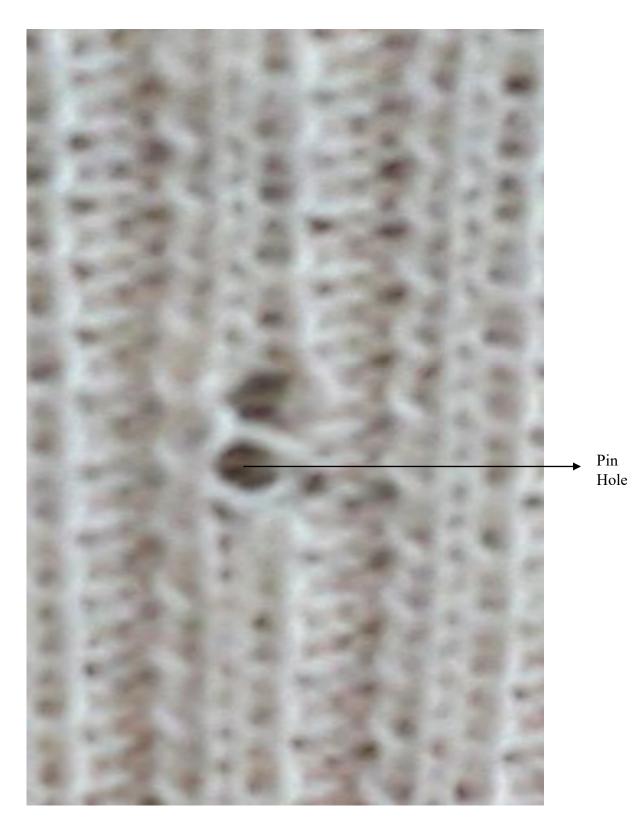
Knitted fabric defects due to tucking: a "Pin hole"
